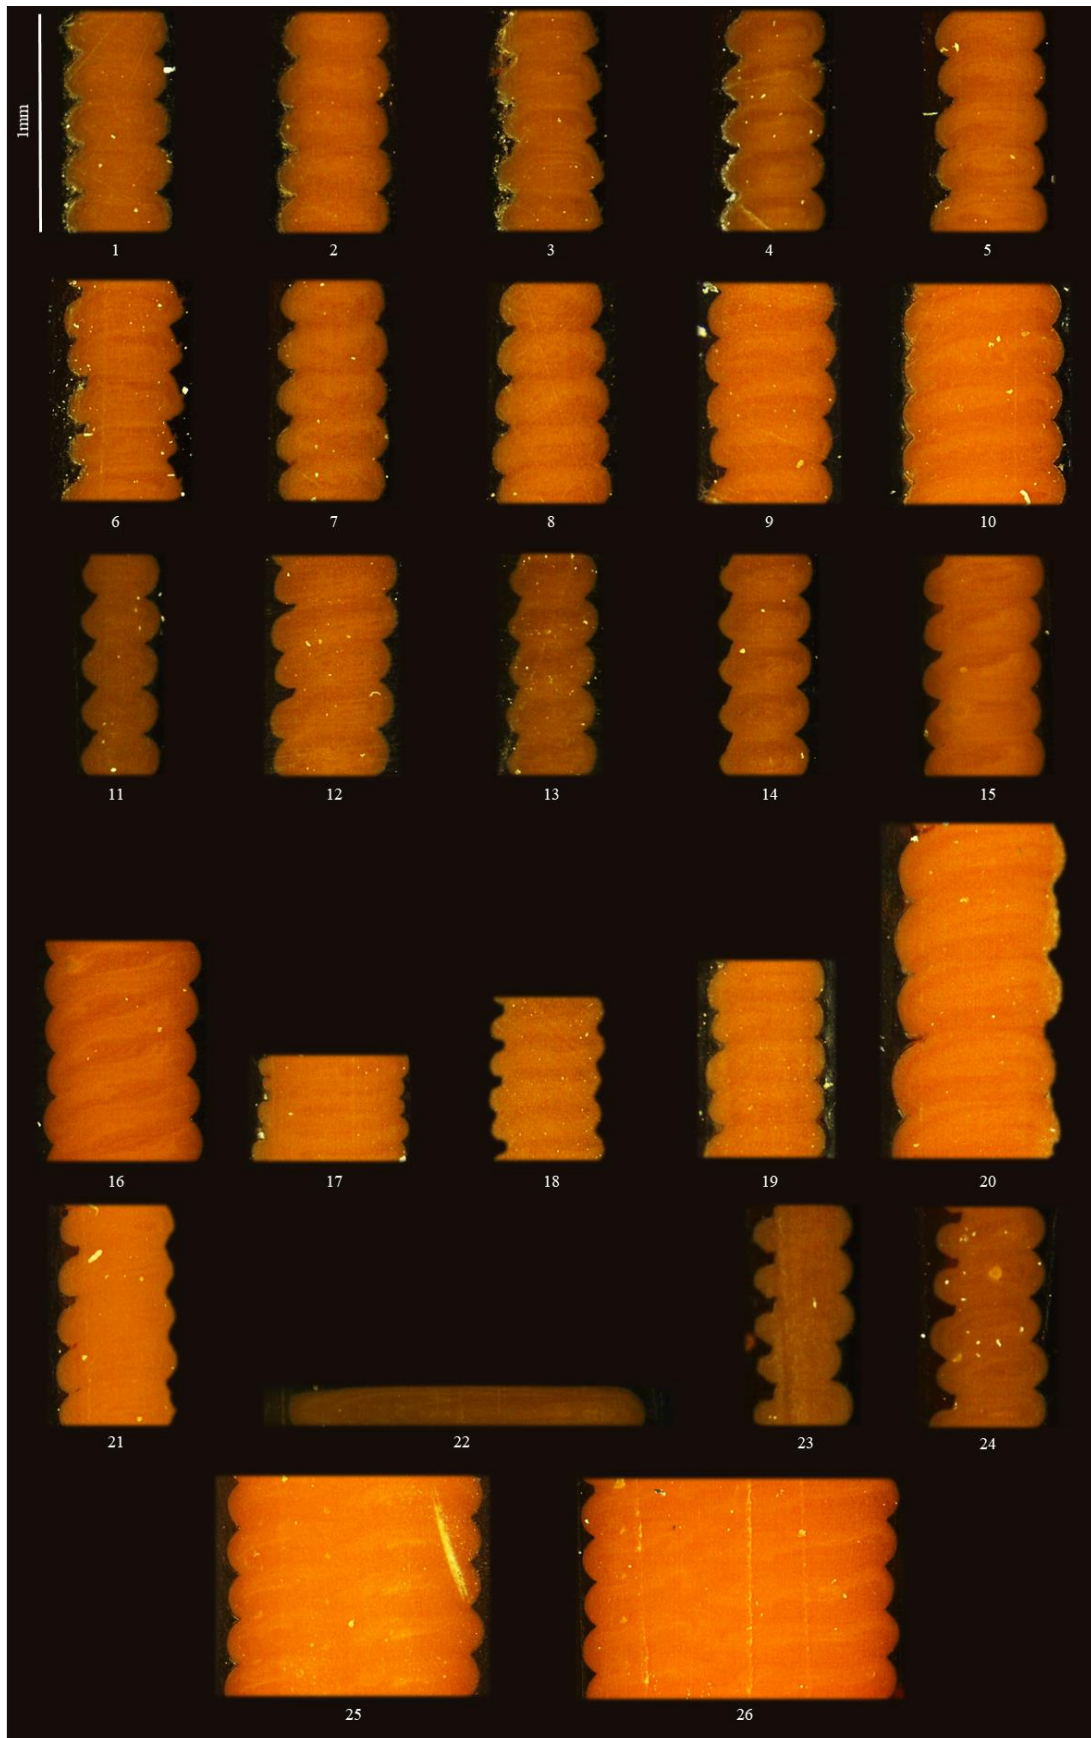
Cross-sectional images Modified Nozzle Design 2
